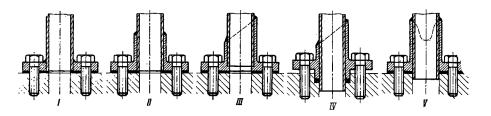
Joining tubes to housing-type parts through flanged fittings
